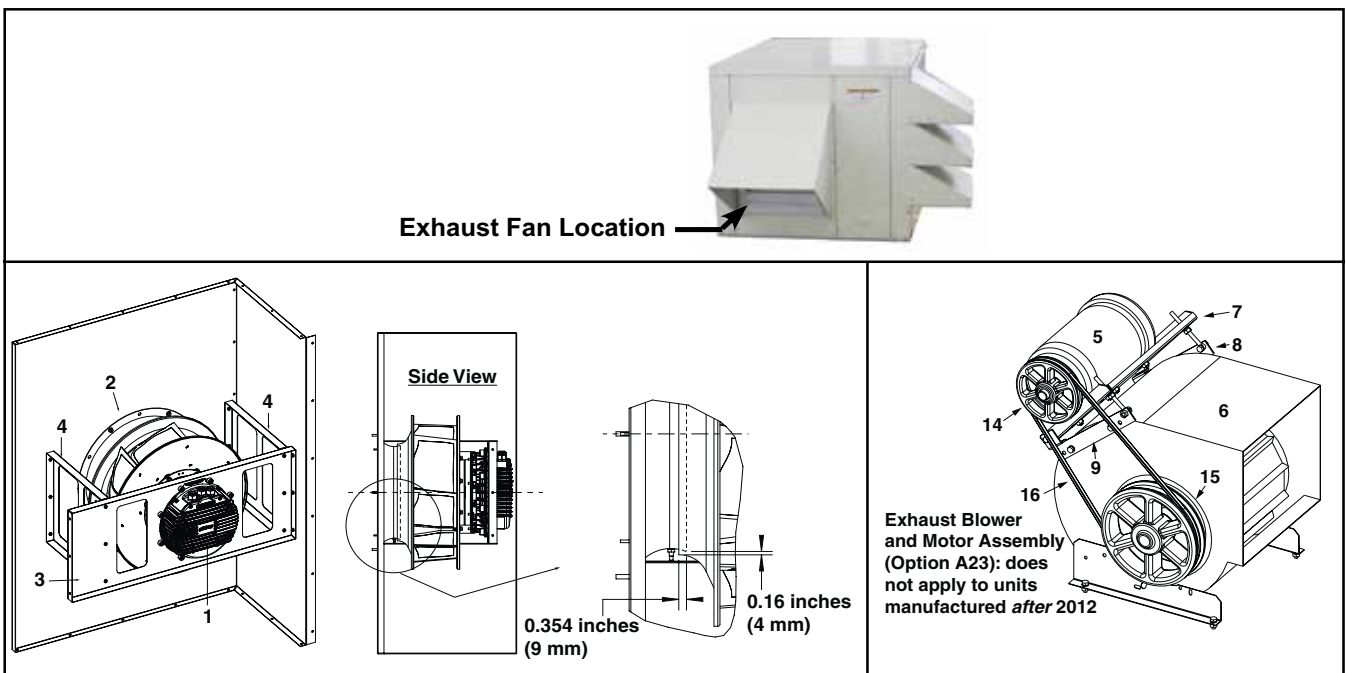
Exhaust Fan Assembly (Refer to [Table 10](#))
